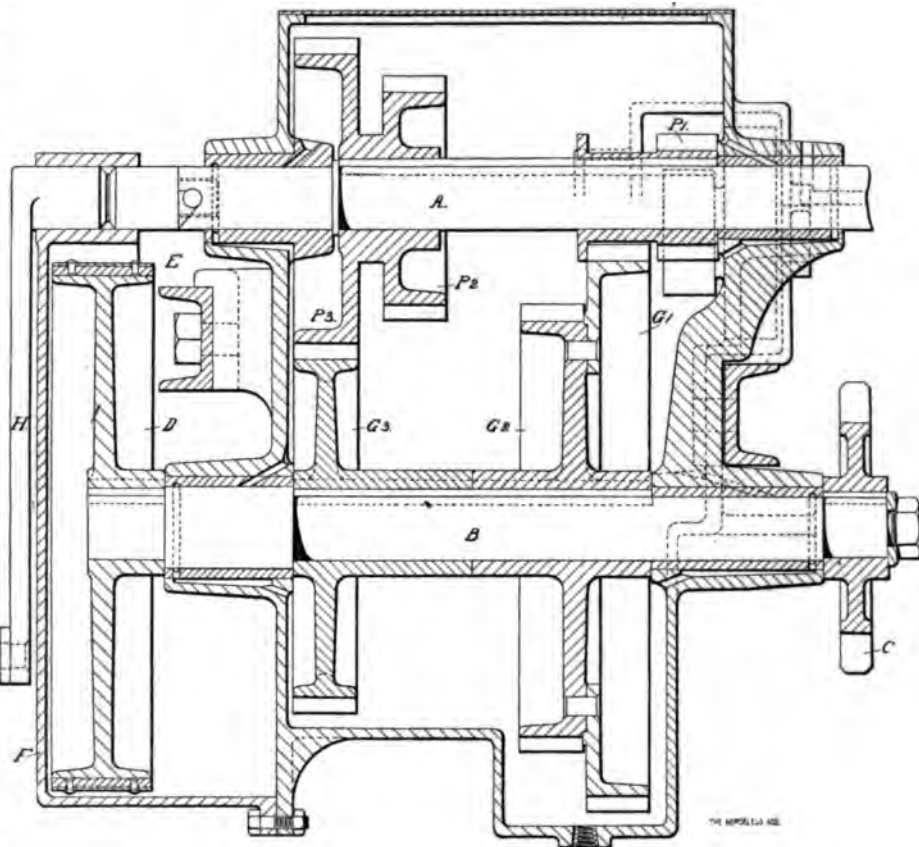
VERTICAL SECTION THROUGH GEAR.
